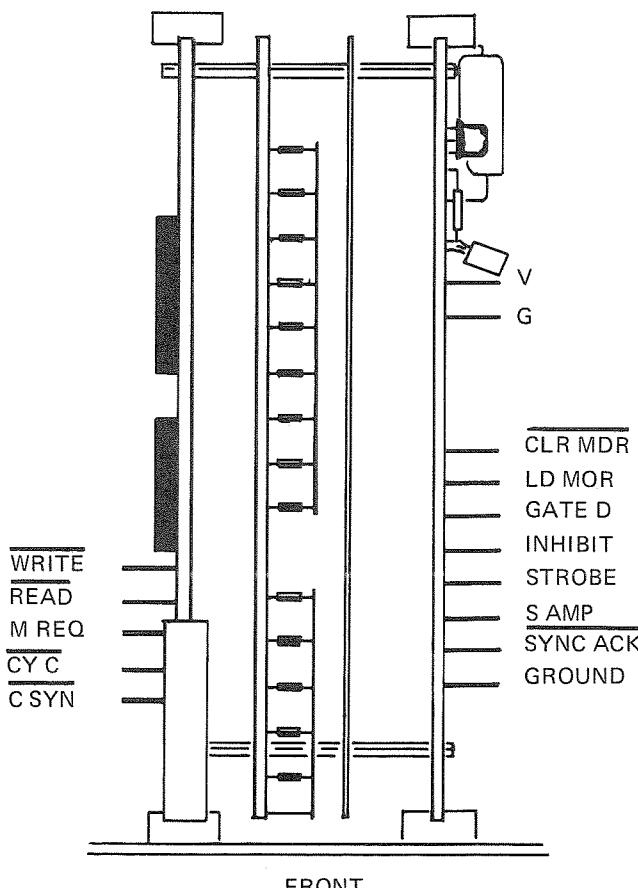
Location of READ test point on the Memory Controller & Address Driver board.
